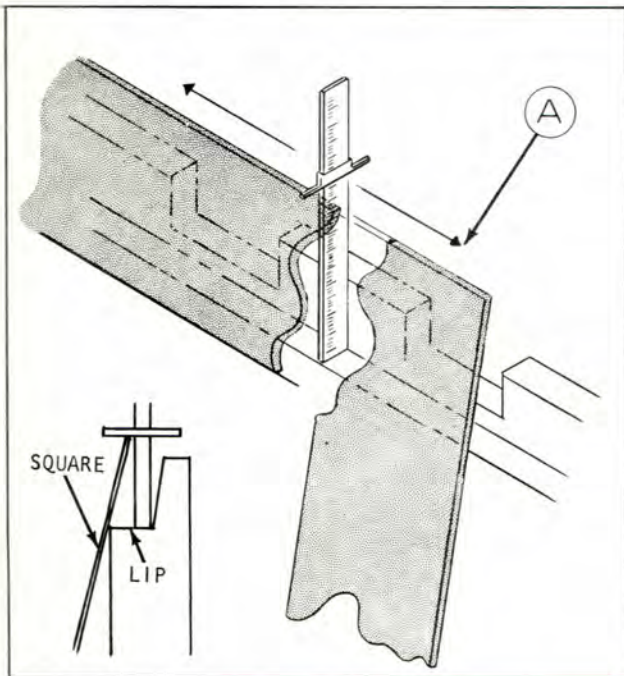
Squaring Carriage Rollers (Six Roller Carriage)
